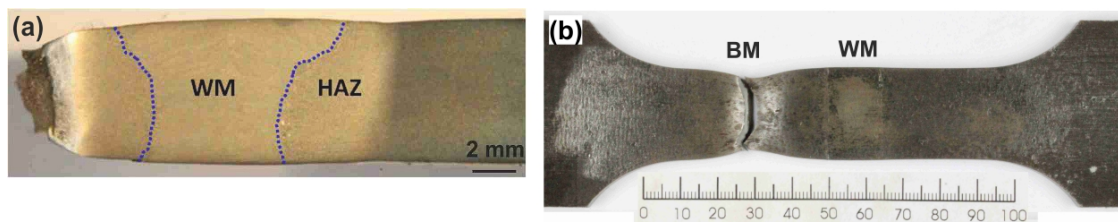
Tensile specimen of weld B2 failed in the HAZ (a) and weld A1 failed in base metal (b) [193]
